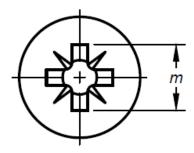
CROSS RECESSED WAFER HEAD DRILLING SCREWS
